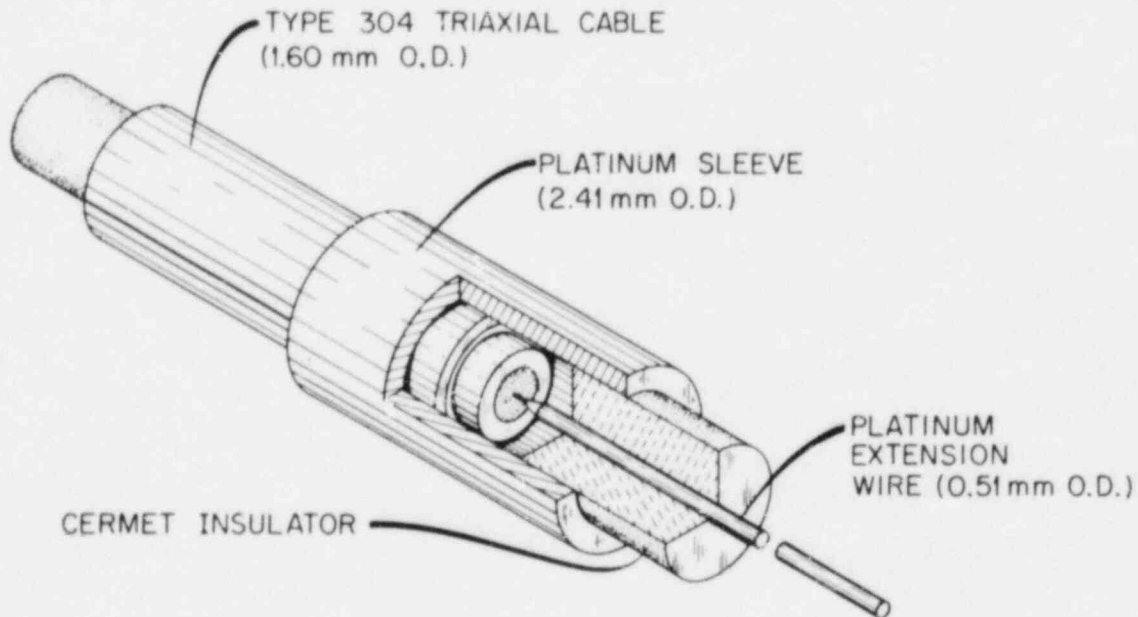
Design of brazed end seal for 1.60-mm-diam (0.063-in.) type 304 stainless steel triaxial cable.
